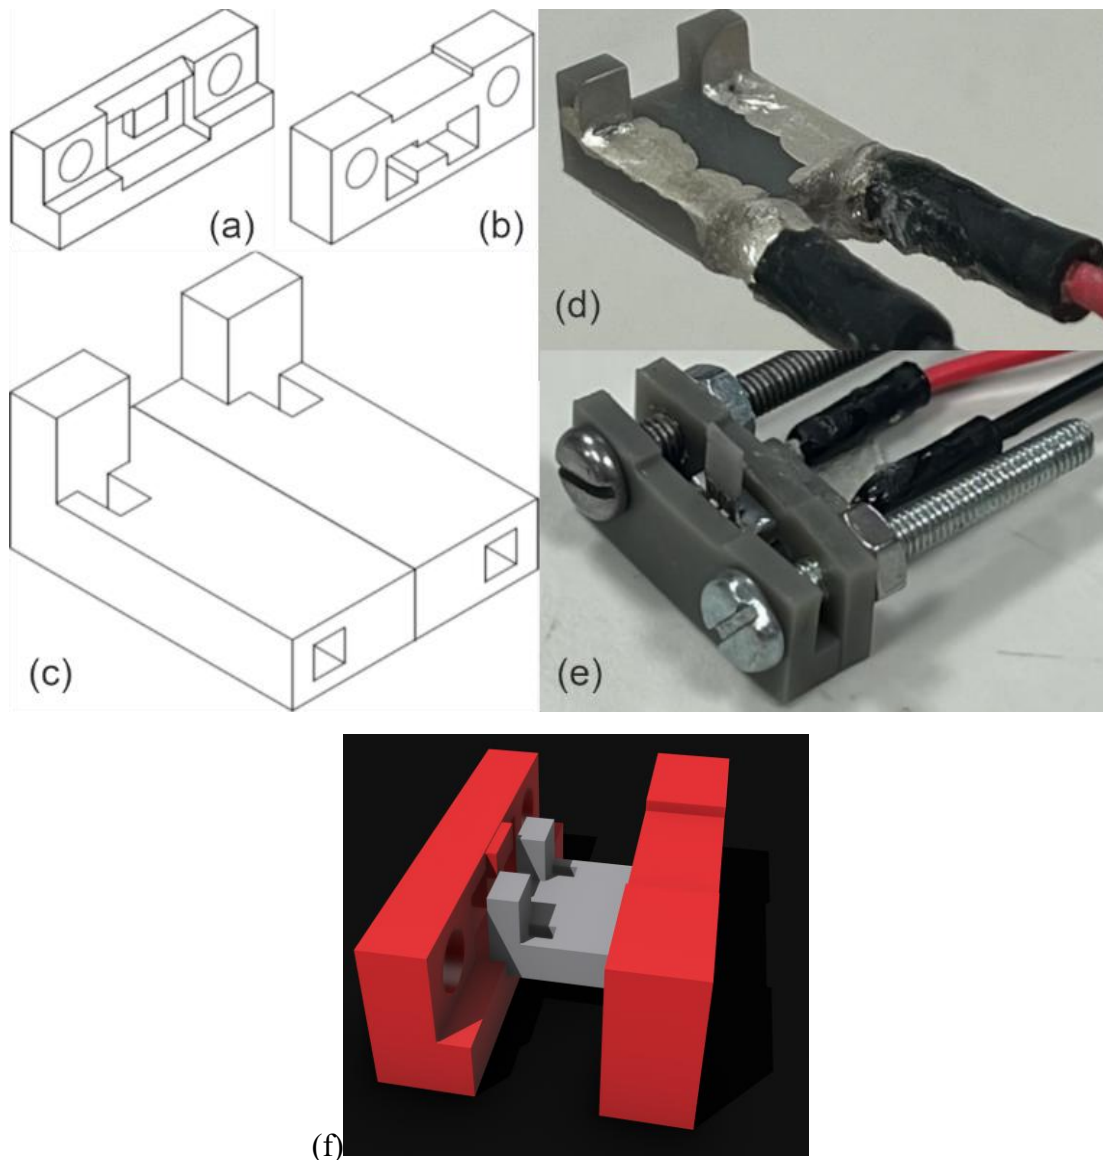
Cable holder and plates to hold the sensor still and add cables for electrical connections. Diagrams of the screw plates, (a) front, (b) back, (c) diagram of the cable holder, (d), printed cable holder with cable connections and (e) plates, screws, sensor and cable holder joint together. Additional perspective showing the screwing plates, in red, fitting the cable holder, in grey (f). Images (a)-(e) first presented in [183].
